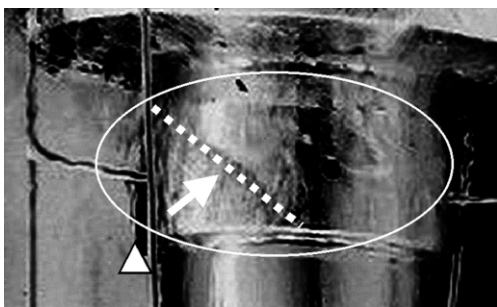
Pulley Shaft Vapor Blanket Collapse after of 30 Seconds
